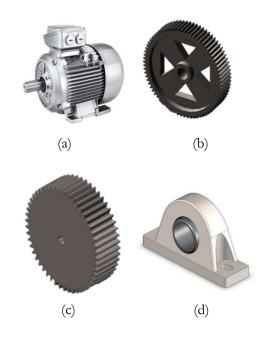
A 3D view of (a) Electric Motor (b) Driven Gear (c) Driver Gear (d) Pillow Bearing
